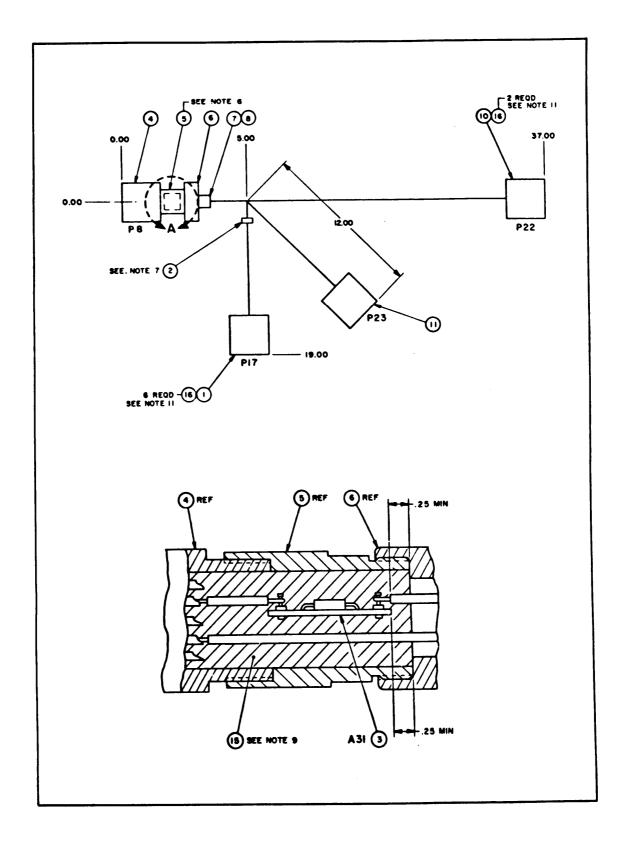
400 Hz Electric Governor System Wiring Harness Assembly Drawing No. 84-704 (Sheet 1 of 2)
